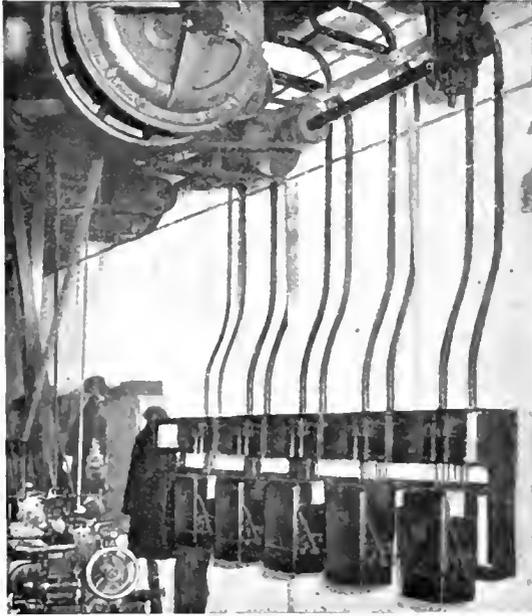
Starting Compensators in Screw Machine Dept. Buick Motor Works
